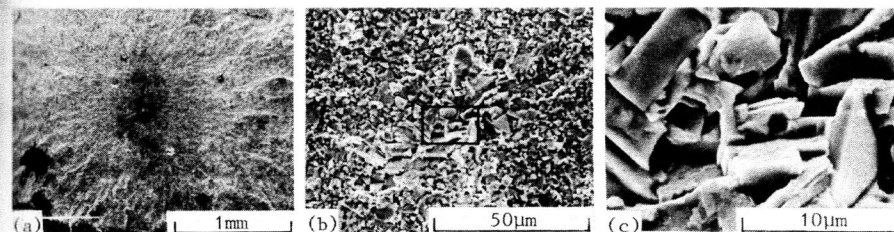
Fractographs showing the area of fatigue crack initiation in the specimen fractured by pulsating tension fatigue ( $R = 0$ ,  $0 \sim 1372\text{MPa}$ ,  $N_f = 1.7 \times 10^5$ ), specimen A in Fig. 5. Figures (b) and (c) are the higher magnification views of the areas in the rectangles in figures (a) and (b), respectively.
